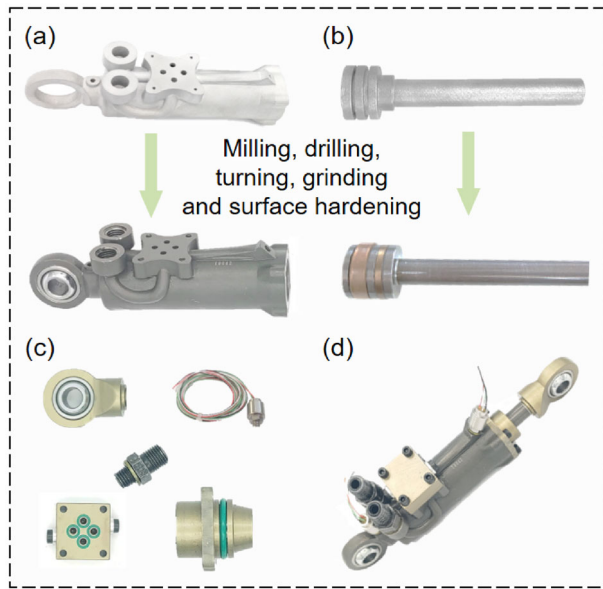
Manufacturing of the actuator: a cylinder barrel, b piston rod, c accessory components, and d highly integrated hydraulic actuator
